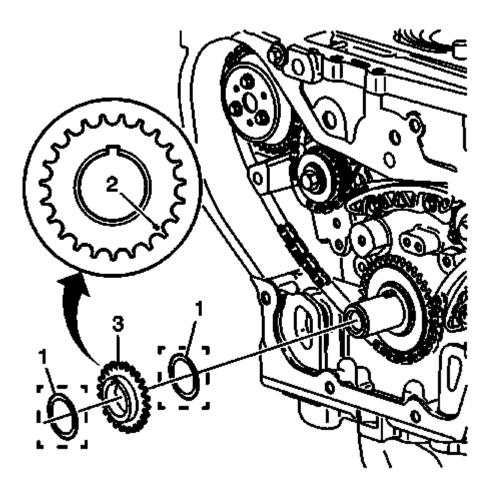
Friction Washer And Timing Chain Drive Sprocket Courtesy of GENERAL MOTORS COMPANY
